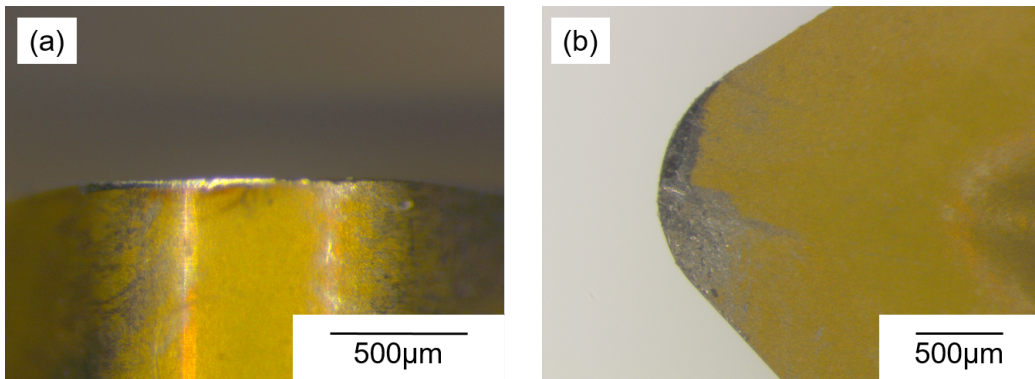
Example tool wear produced during face turning of face 1 on billet 3.1. The tool shown was used during the 1st repeat of face 1. The tool shown is representative of all passes performed on face 1.
